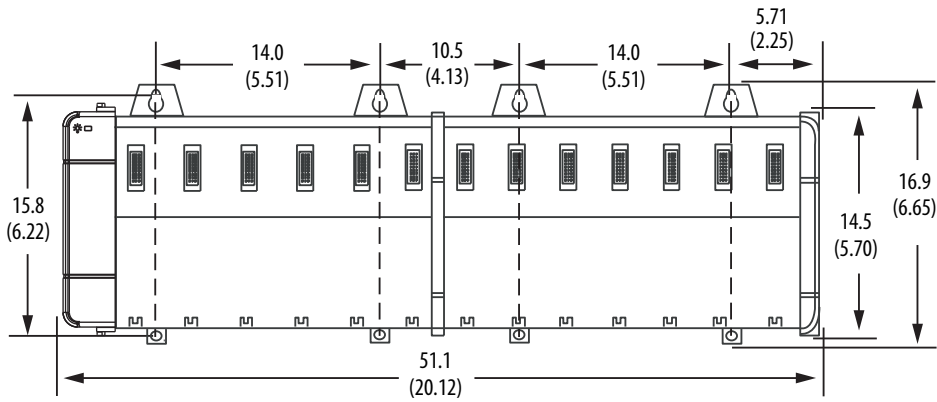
1756-A17/B Chassis and Chassis Adapter Module.
